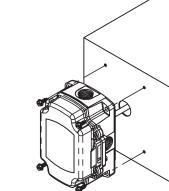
BAPI-Box (BB) Enclosure Mounting Holes, Rotate 90° for Horizontal Mounting
